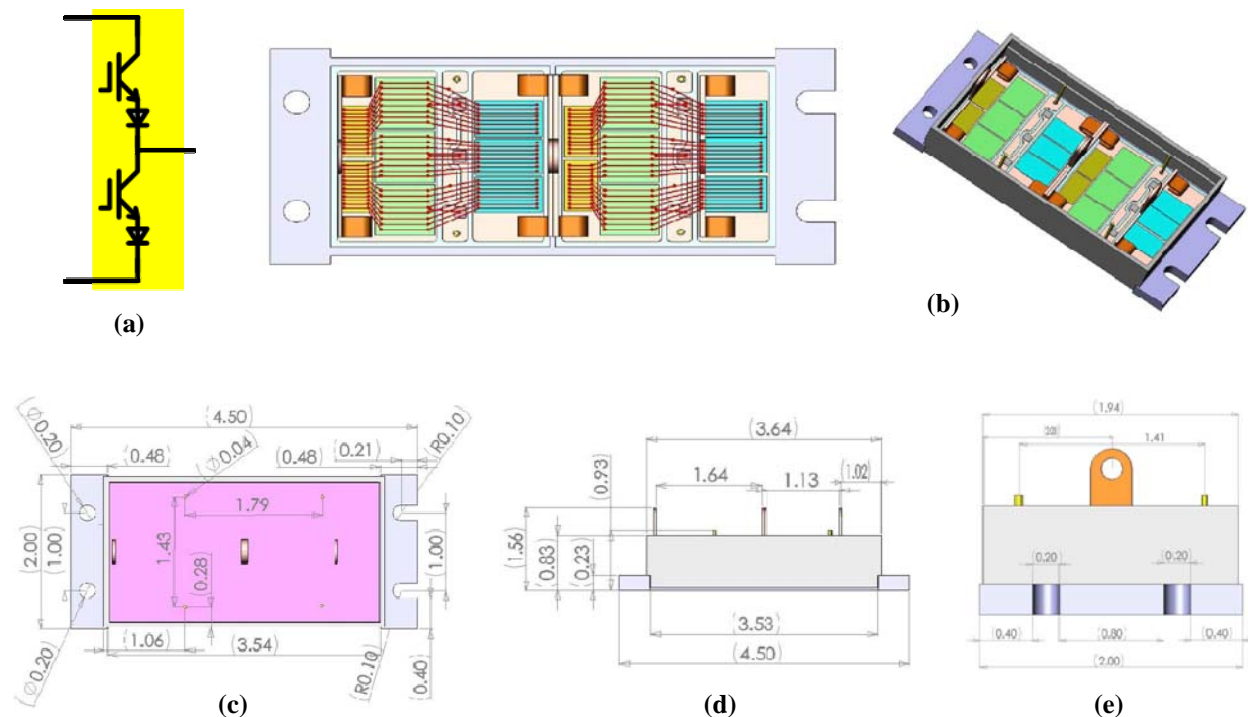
Custom CSI switch leg module design: (a) switch configuration, (b) two views of chip layout, (c) top view, (d) front view, and (e) right view.
